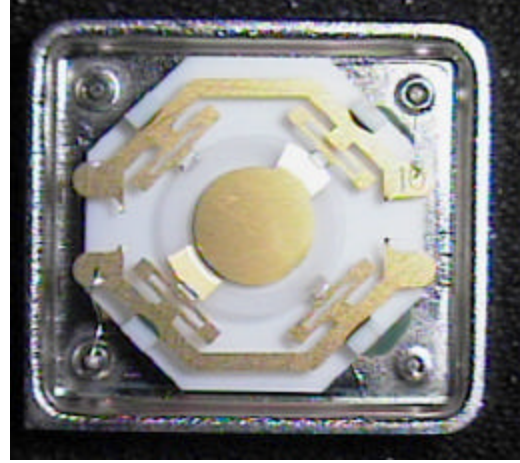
(10mm) DDIL Cold Weld QRM Structure (no flats).
